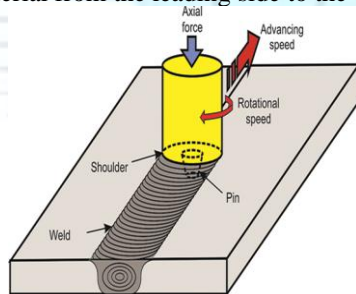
Schematic diagram shows friction stir welding process and terminology.
